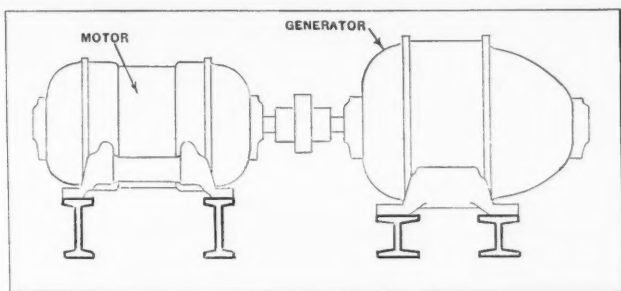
Using I-beams and H-beams for Welded Bases
